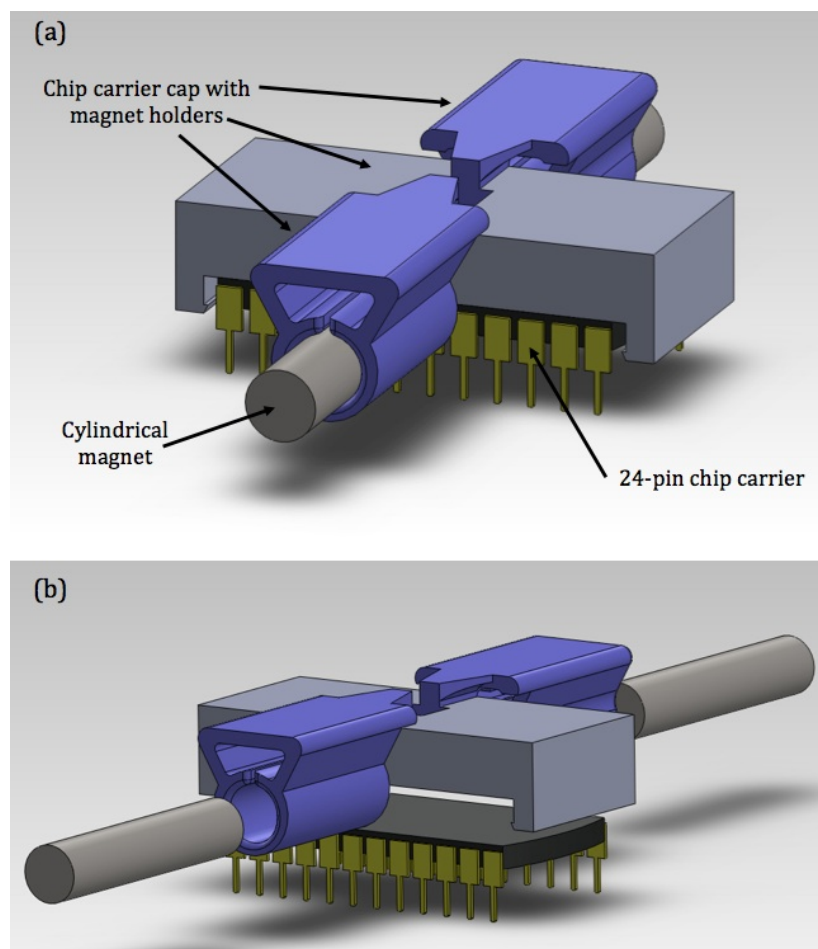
a) Assembly of the chip carrier, magnets and the cap, b) Exploded view of the assembly
